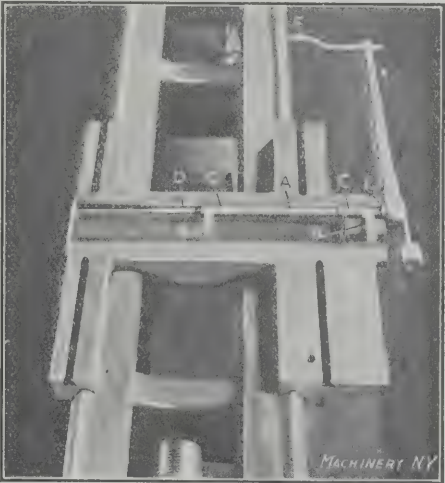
Top View of Carriage, showing Method of Squaring the Carriage with the Bed. Springs B and D hold the Sweep in Position, enabling One Man to make the Test
